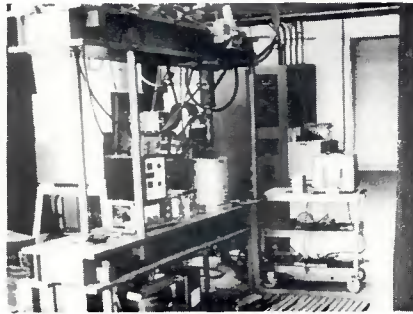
The experimental DC resistance spot welding machine on which test welds for the profile study were made
